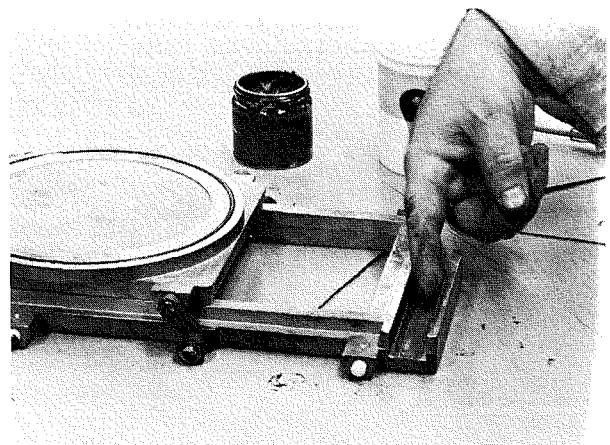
Lubrication of the gate-carriage cam-roller slot of valve B.
